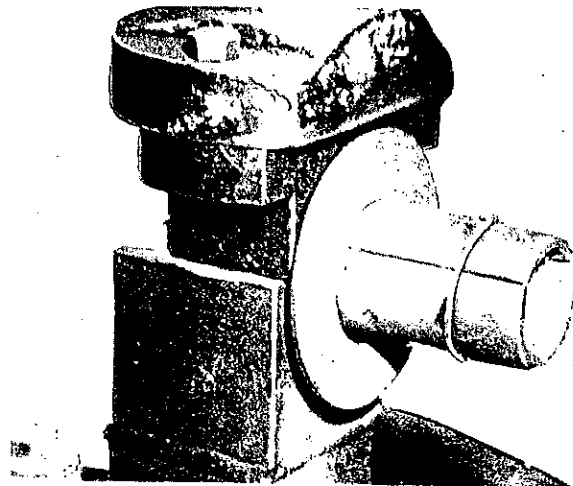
FRICTION UNIT COMPLETE, with ring and wire band in assembly fixture
